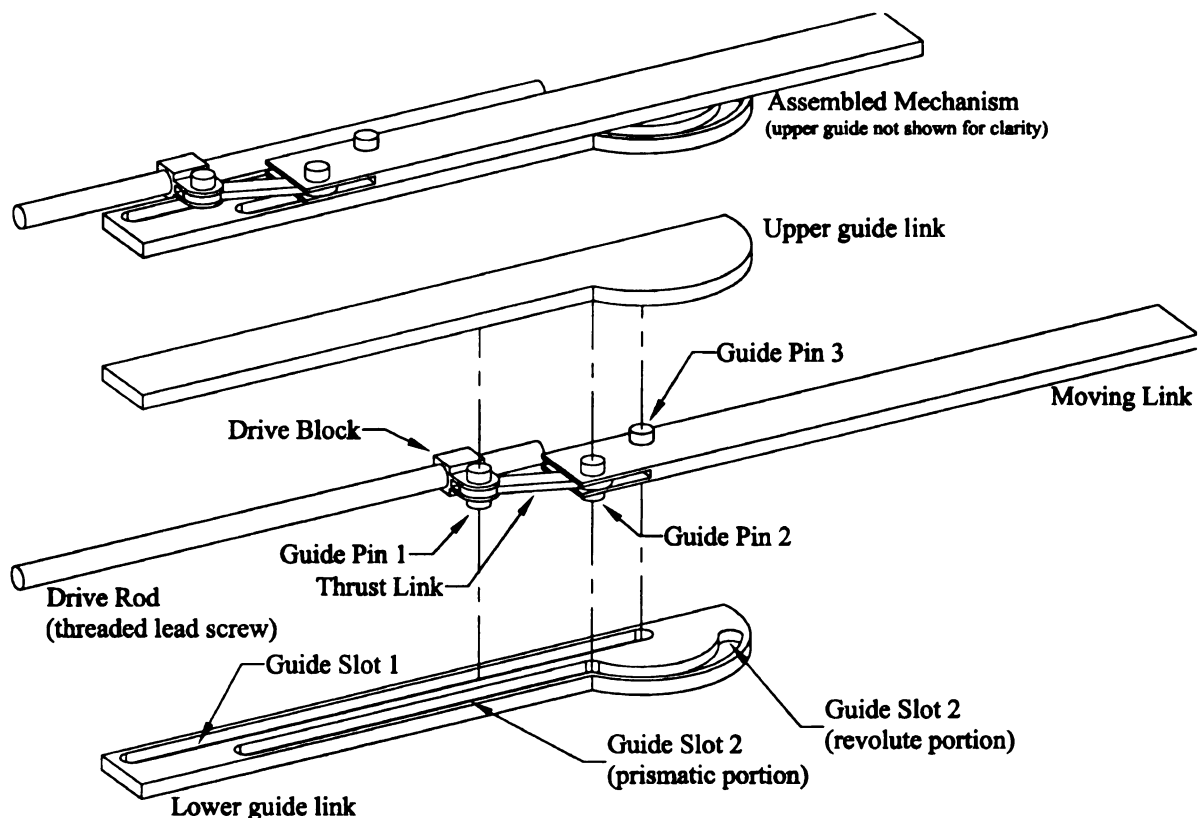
A hybrid revolute and prismatic joint shown assembled and in exploded view.
